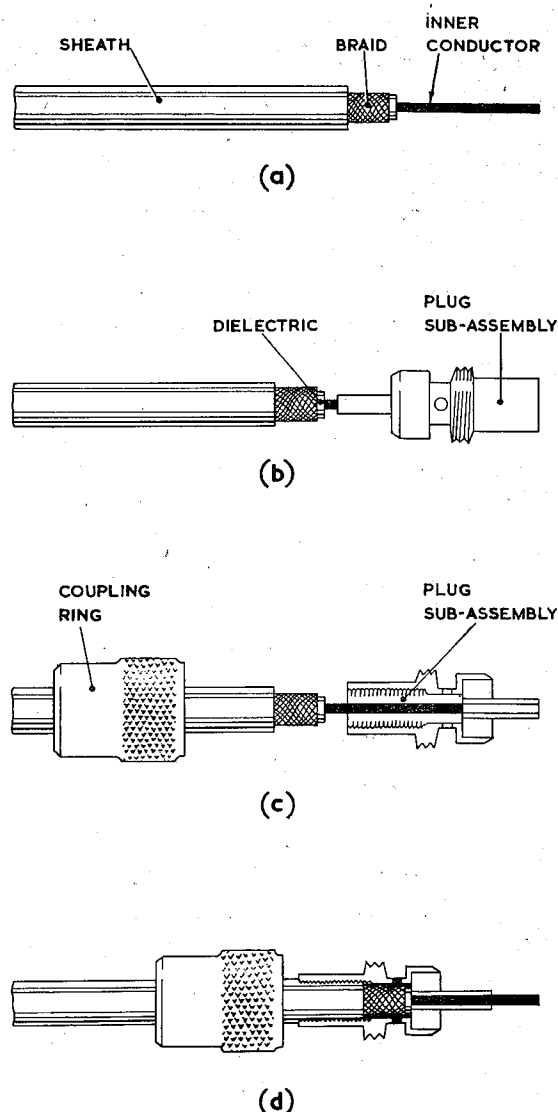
Straight plug assembly for frequencies to 3600 Mc/s
